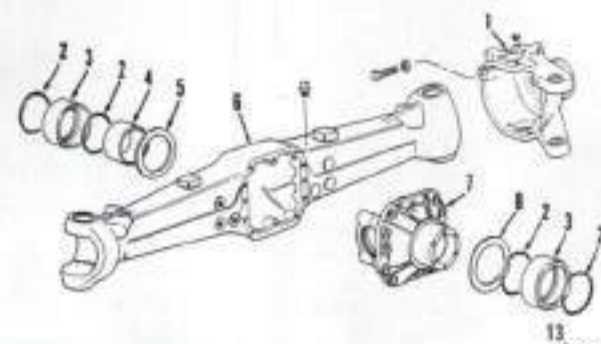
Exploded view of Carraro Type 709/19 front drive axle used on late Models 1394, 1494 and 1594.
